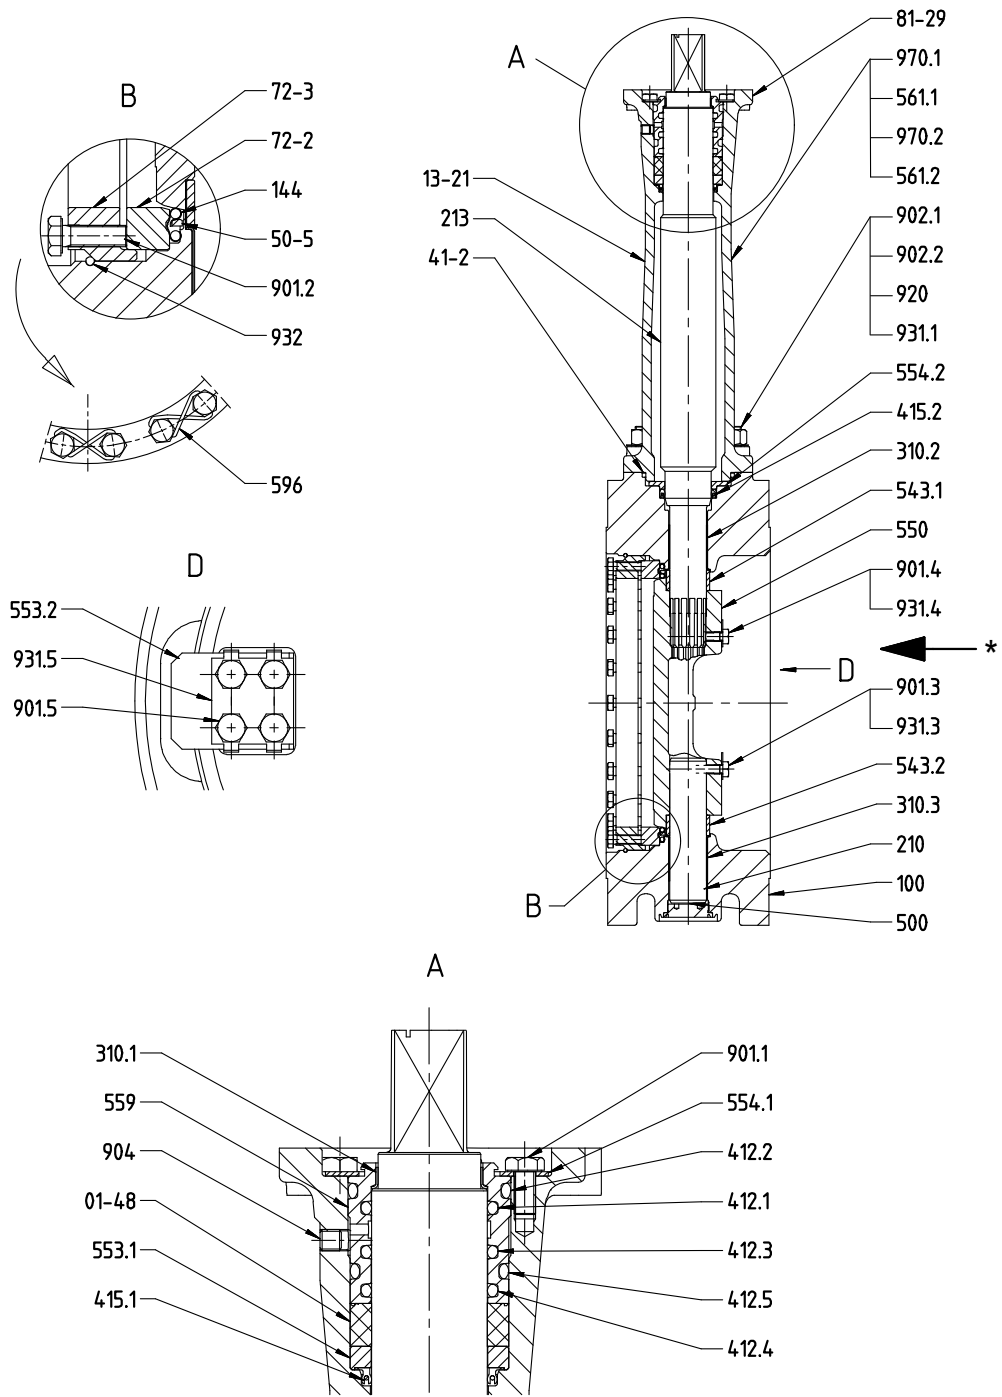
Sectional drawing of DANAIS CRYO T7 - DN 300-600 (12-24 in.)
